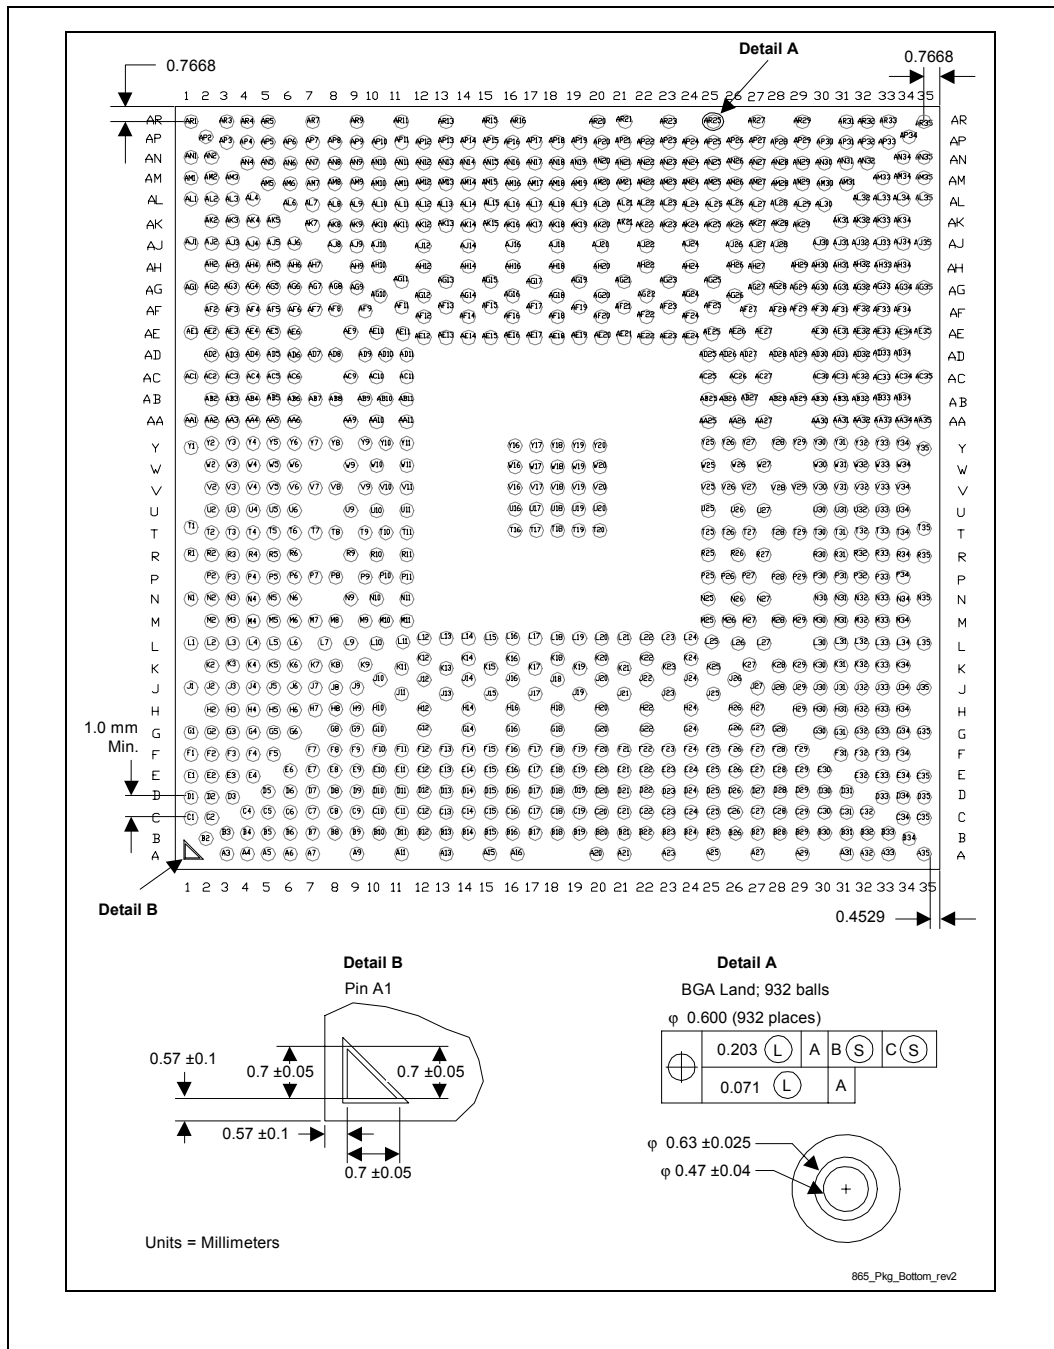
Intel® 82865G GMCH Package Dimensions (Bottom View)
